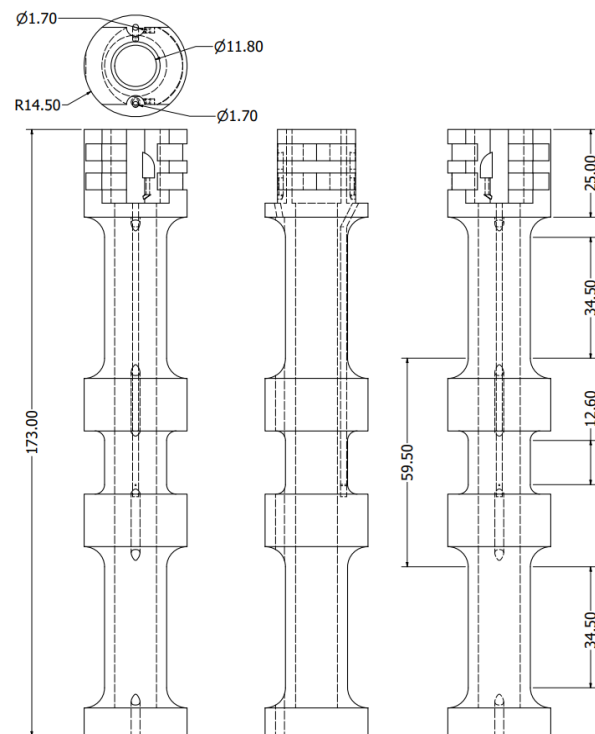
Technical drawing of carcass designed in Autodesk Inventor Professional 2021. Four projections of the model with marked chosen dimensions on
